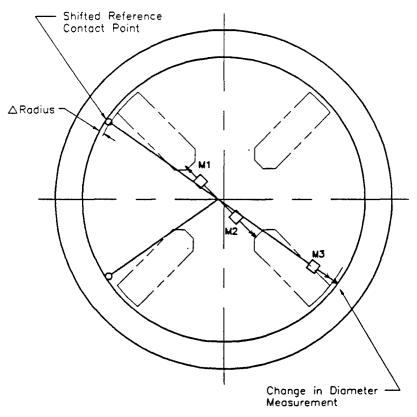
Tool Shift Due to Increase in Internal Diameter of Support Tube
